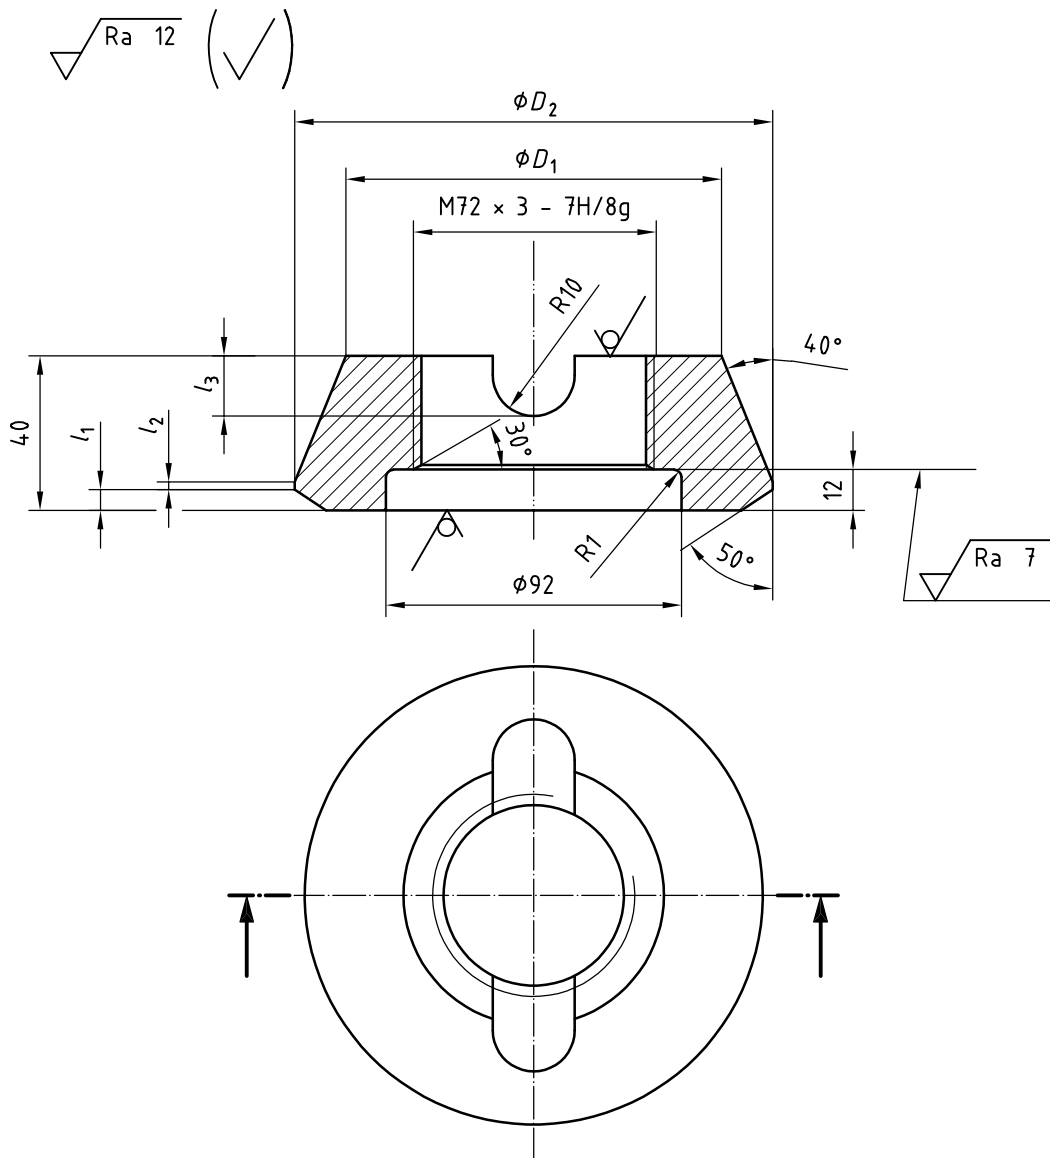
Type A welding ring (see Table 6 for main dimensions)
